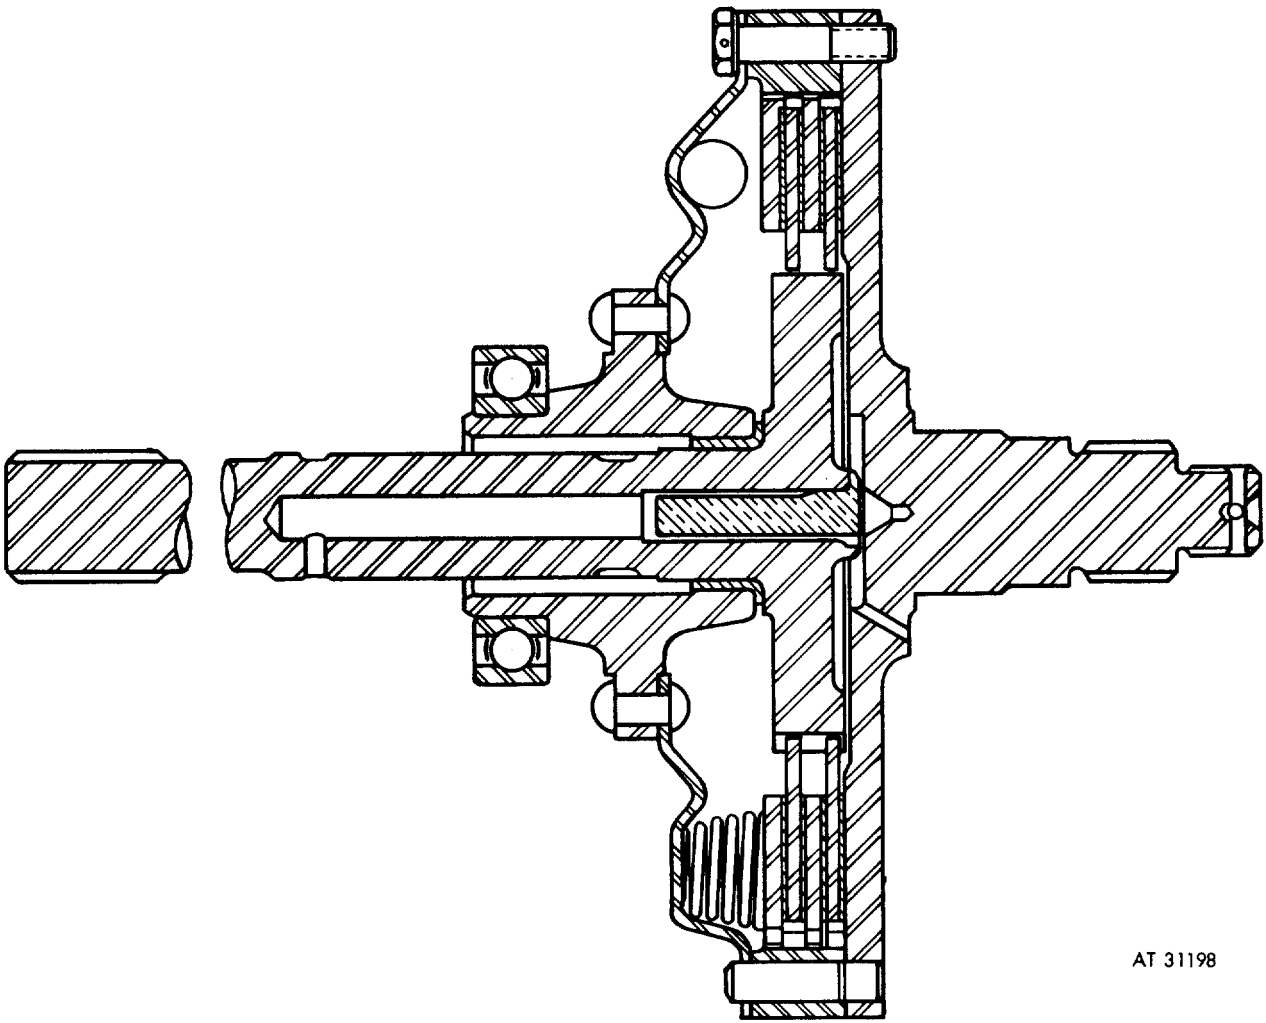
Removing or installing front fan drive housing oil restrictor (engines having oil restrictors).
